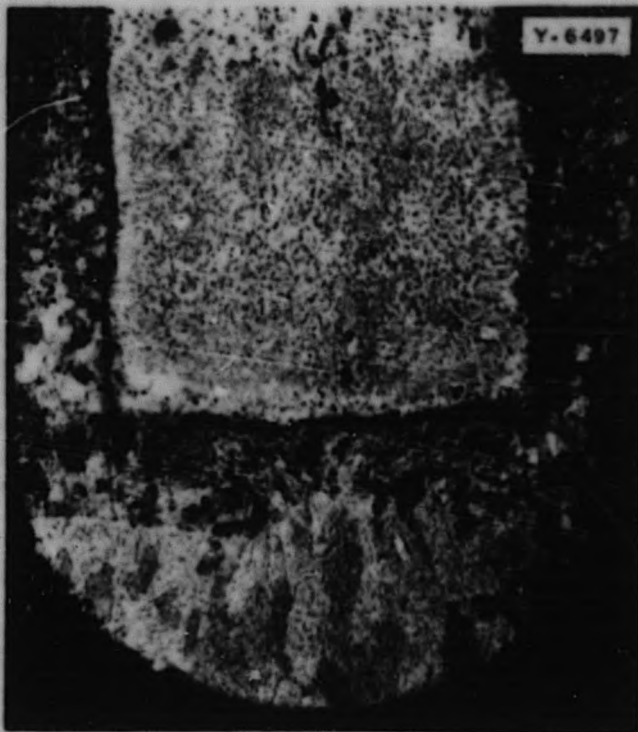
Zirconium-3% Nickel Weld on Uranium-Zirconium Plate. 40X.
